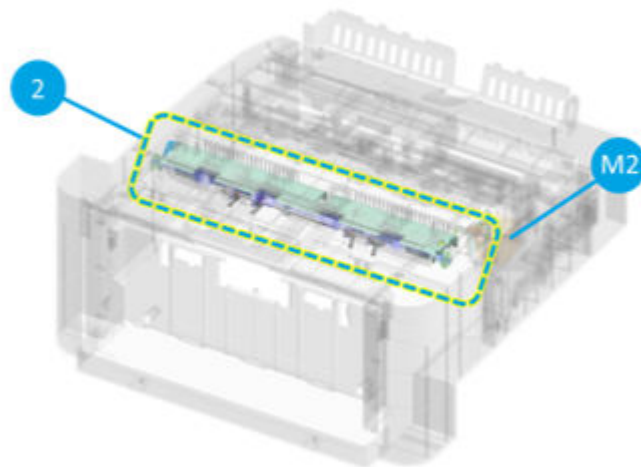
Inner finisher system - paddle unit driving system detail view (1/2)
